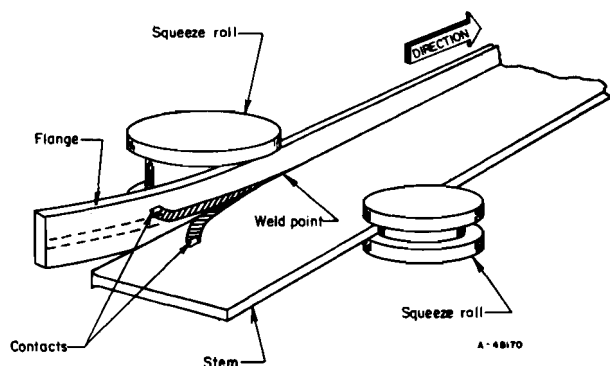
CONCEPT FOR HIGH-FREQUENCY RESISTANCE WELDING TEE SECTIONS⁽¹⁵⁾
